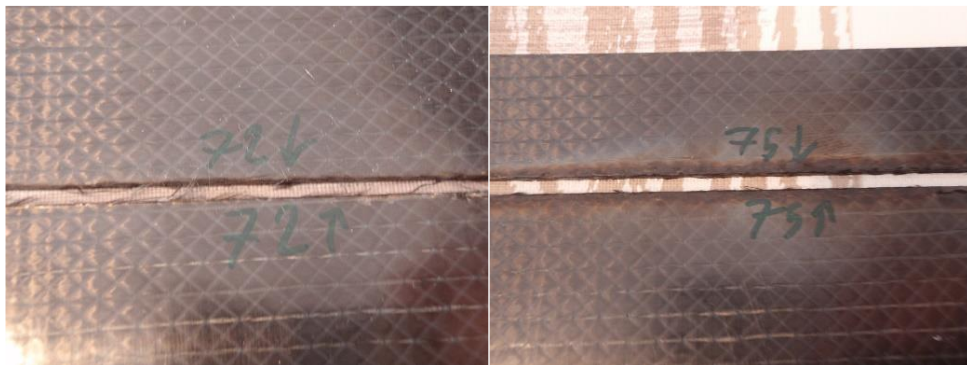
Images of top side laser cut surfaces of tests 72 (left) and 73 (right).
